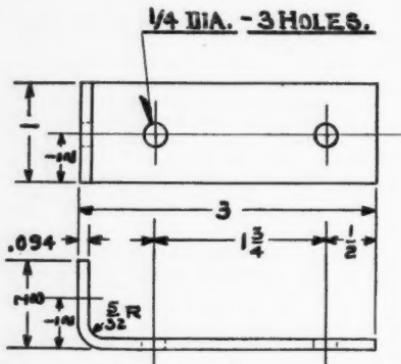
Drawing of an L-bent blank of the type that is formed in the bender shown in Fig. 2.
